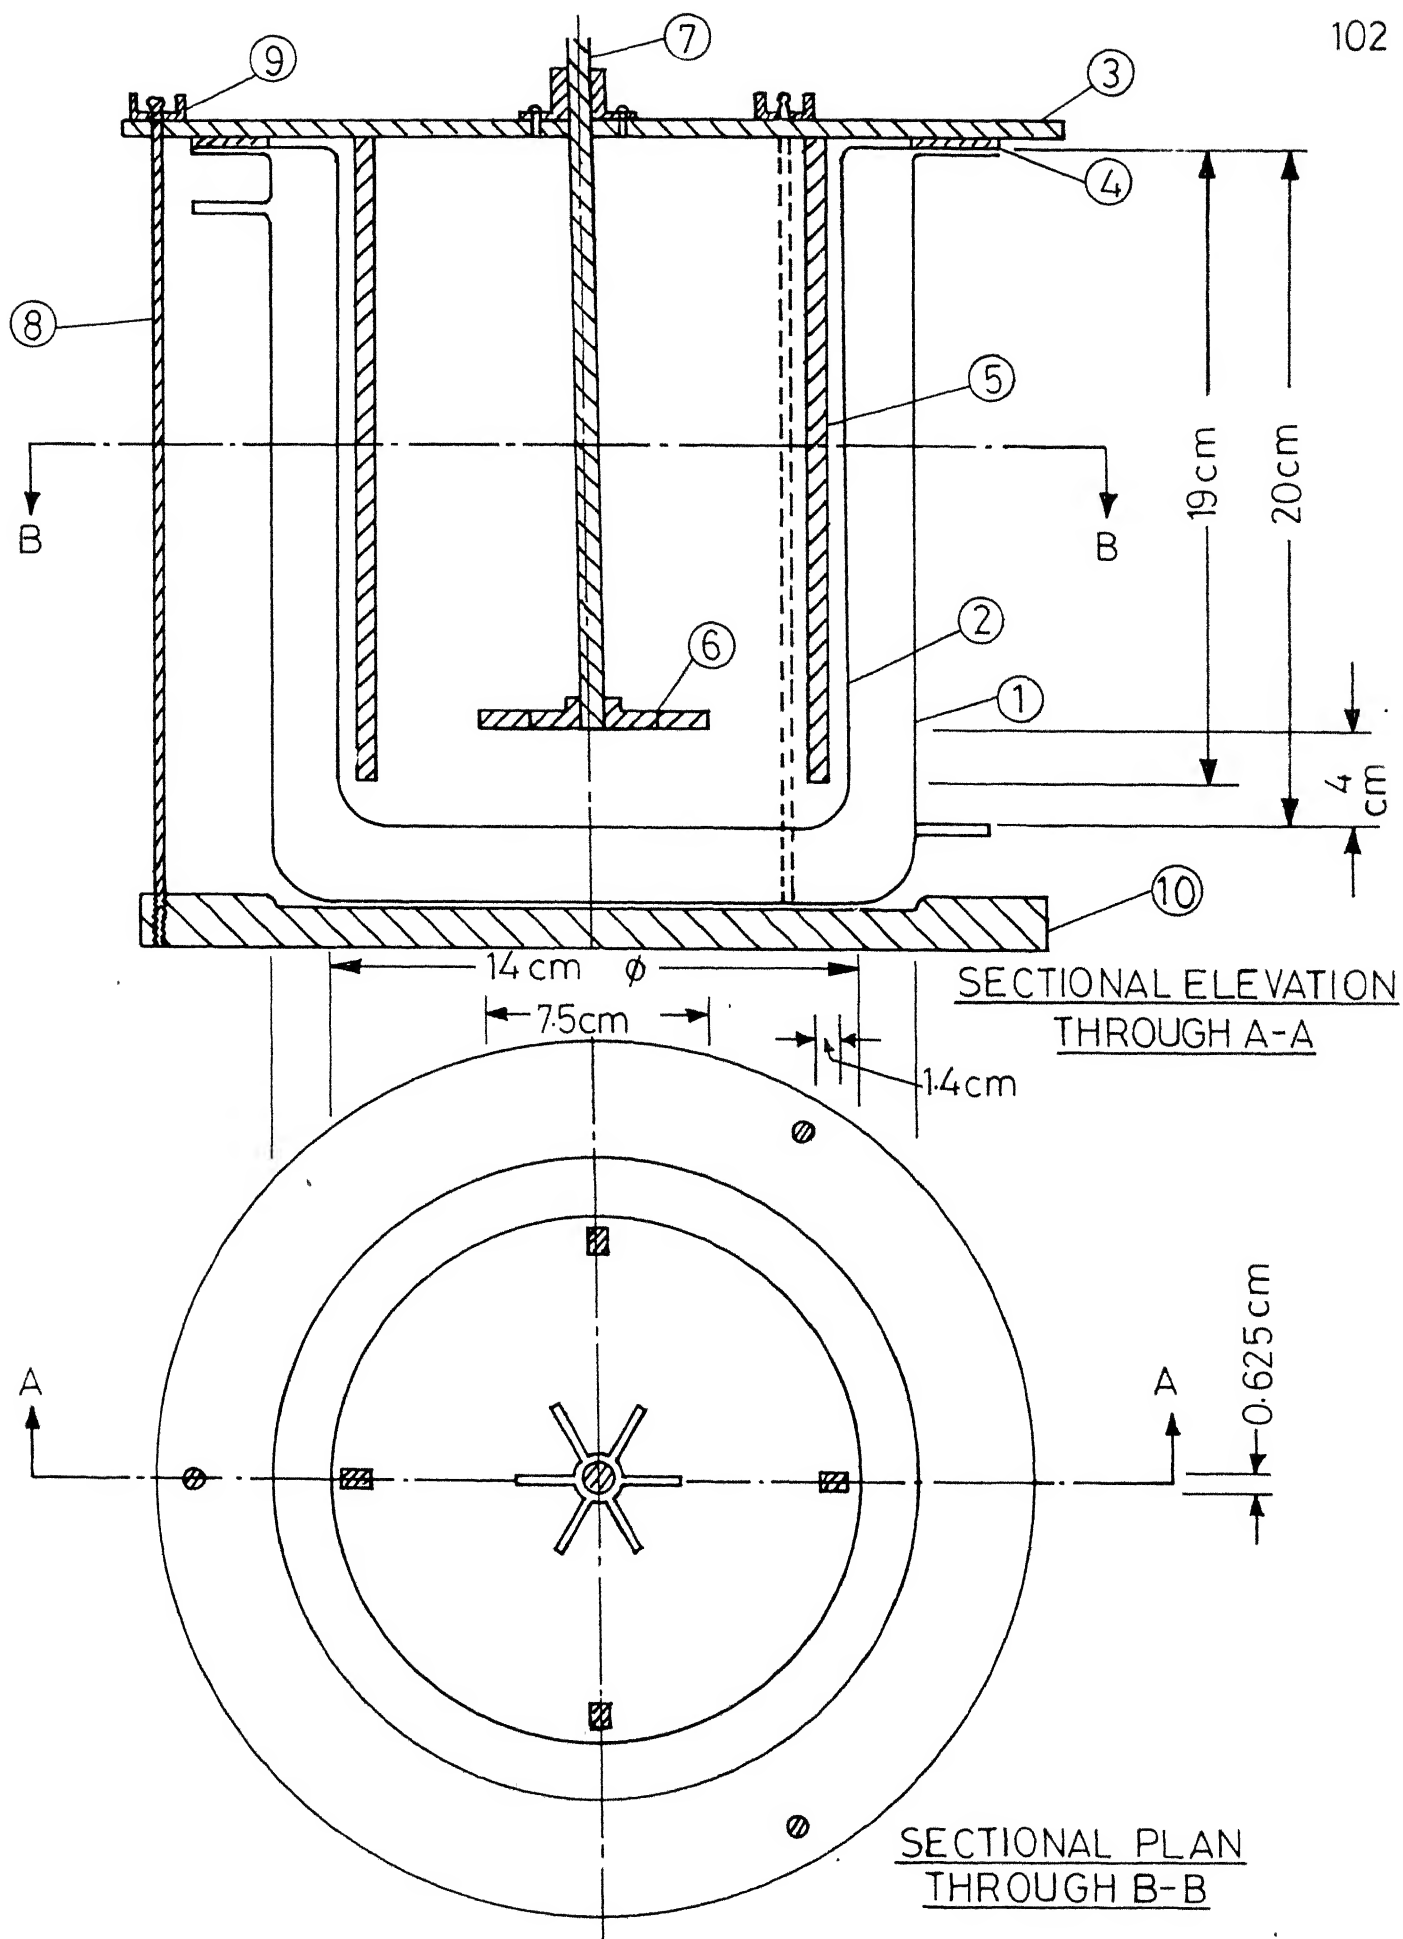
Plan and elevation of mixing vessel assembly.
